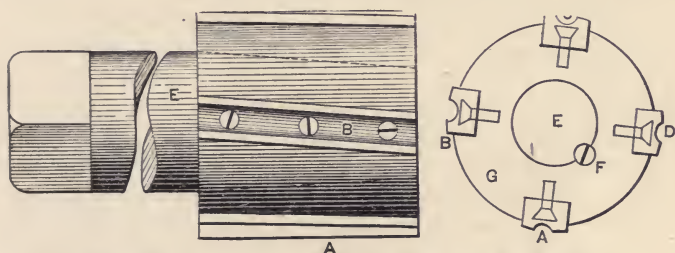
ADJUSTABLE REAMER FOR LARGE WORK.
